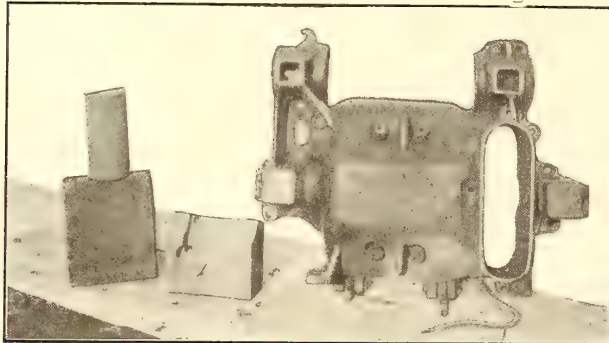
MOTOR FRAME WITH BROKEN LUG
